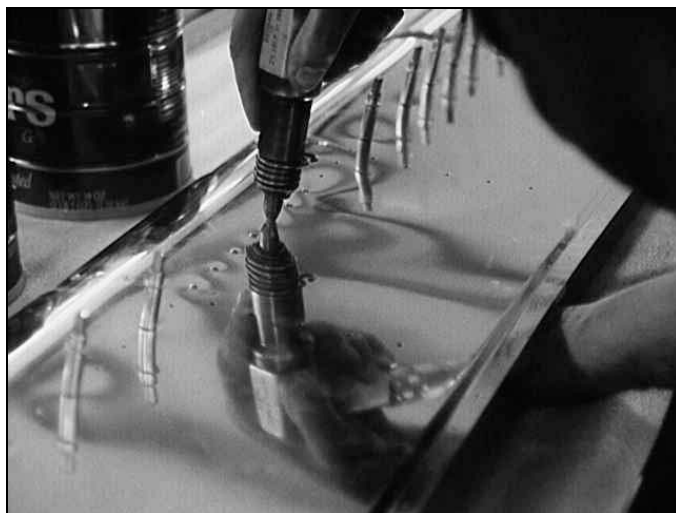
Riveting the Skin to the Lower Flange of the Spar
